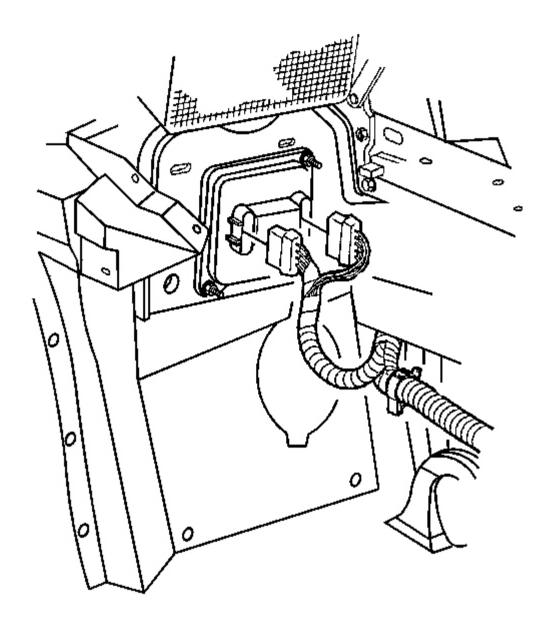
Electrical Connectors To Headlamp Control Module Courtesy of GENERAL MOTORS CORP.
